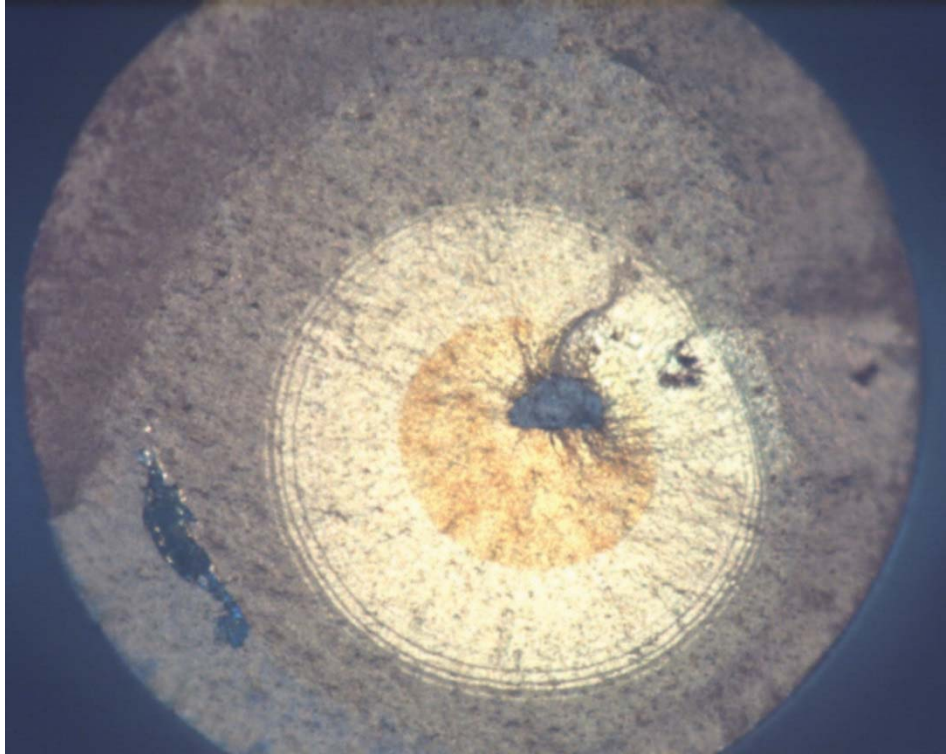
Fracture surface for specimen MWF 6114
